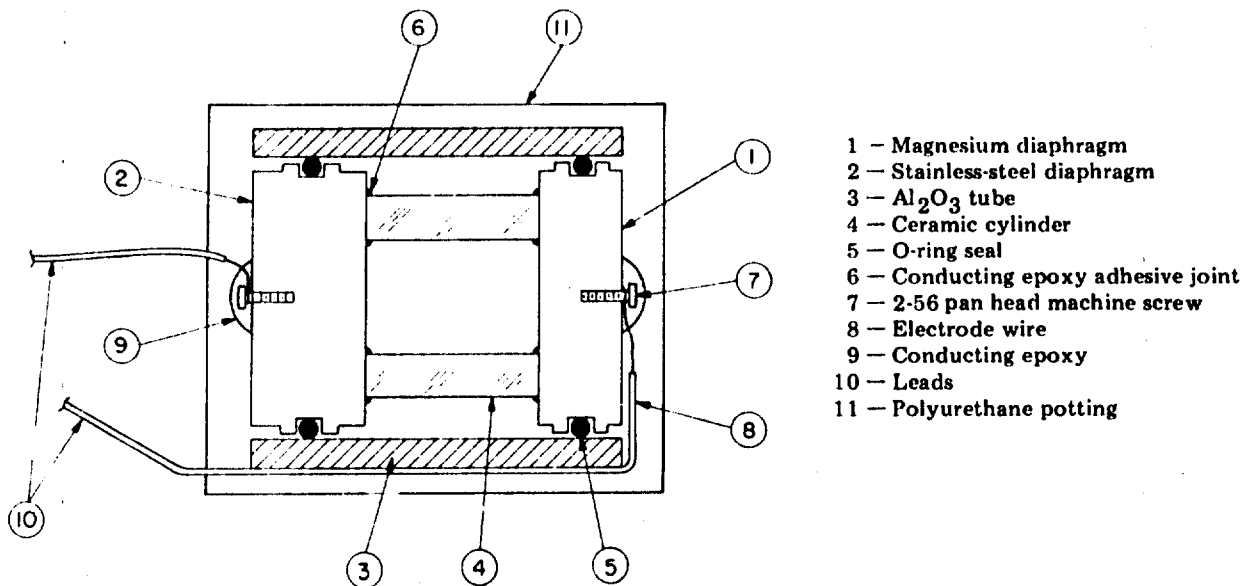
Sectional view of H68B hydrophone sensor element assembly
